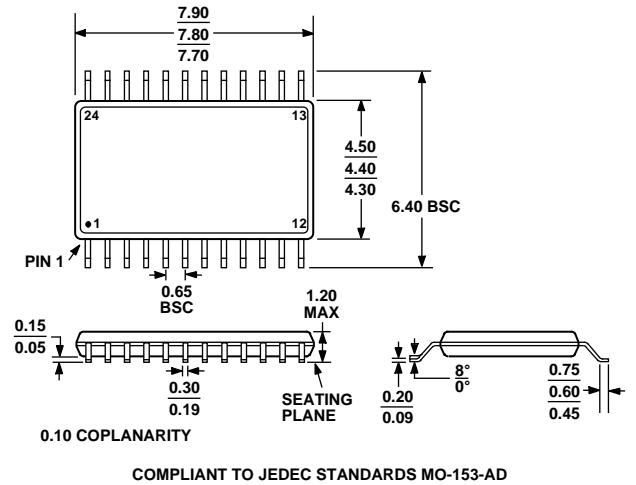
24-Lead Thin Shrink Small Outline Package [TSSOP] (RU-24)
